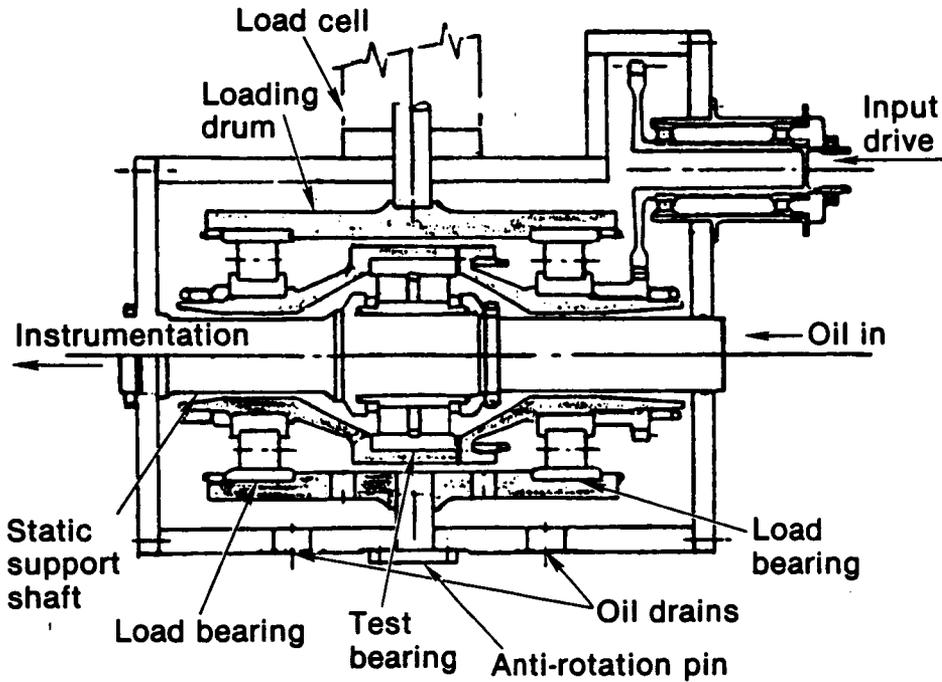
Single Bearing Test Rig - This rig will provide data on planet bearing friction and wear. (J27638-125)
